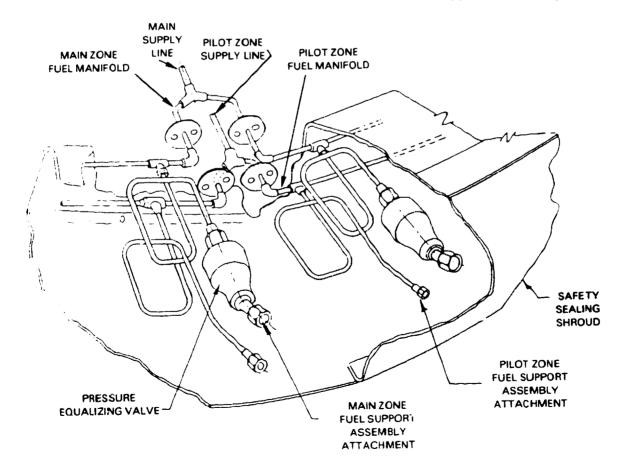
Fuel Manifold and Safety Shroud
